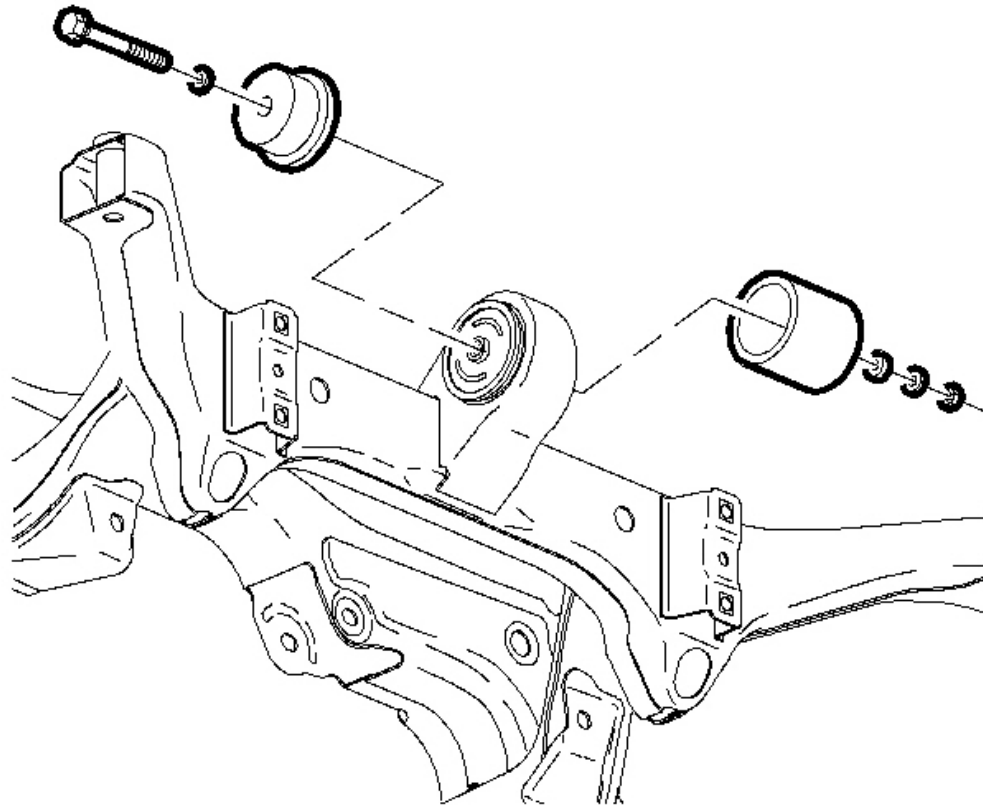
Positioning RDM Support Bushing On The Vehicle Frame
